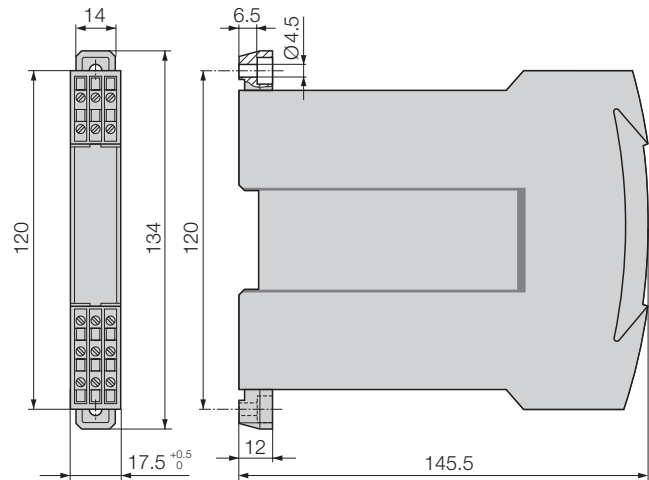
SINEAX SV 824 in housing S17 screw hole mounting brackets pulled out.
